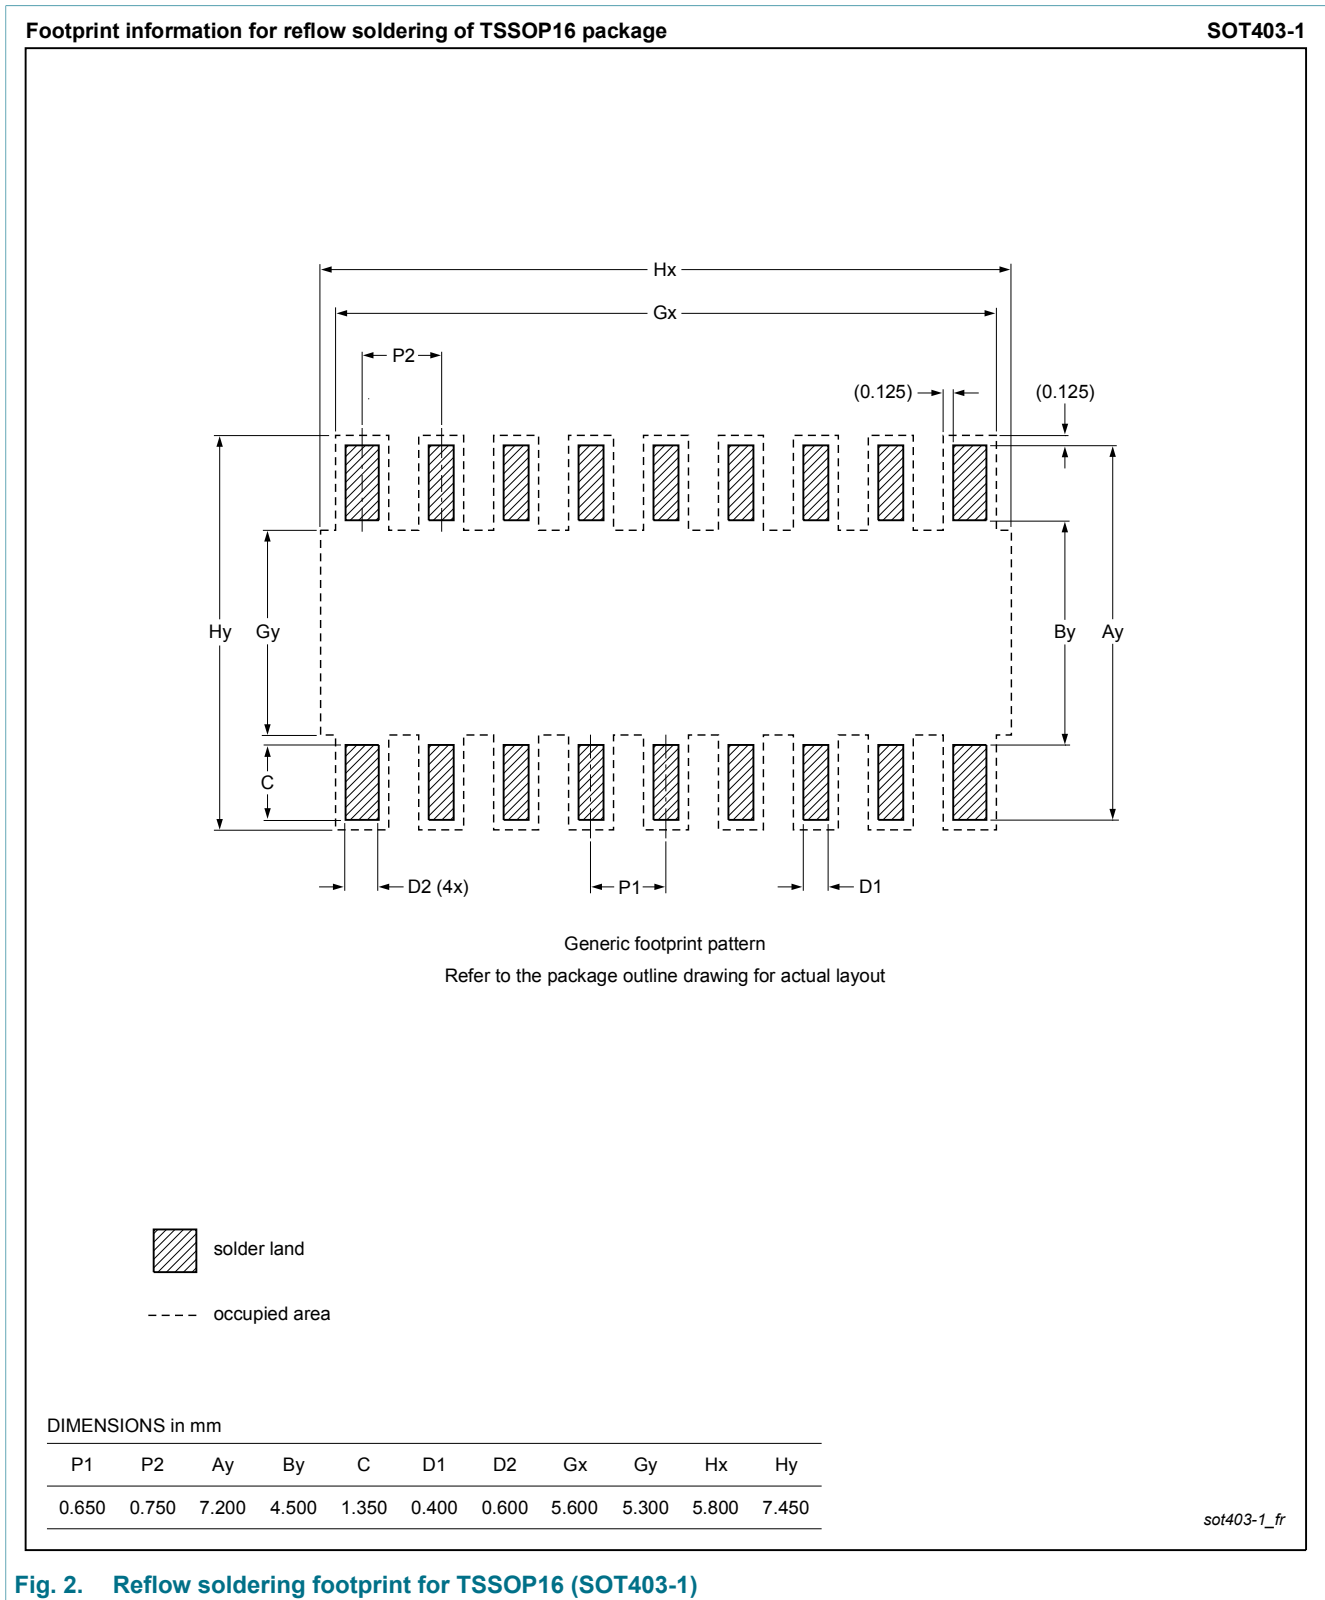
Reflow soldering footprint for TSSOP16 (SOT403-1)
